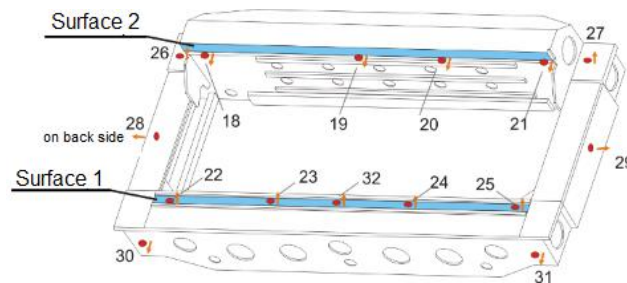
Scheme of test workpiece with marked 1-axis accelerometers positions
